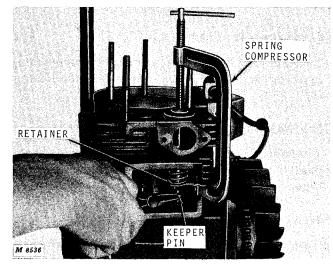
Installing Valve Springs, Retainers and Keeper Pins
